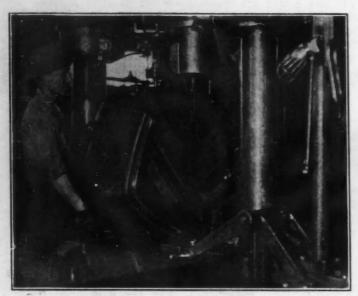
Hydraulic Presses Draw the Blanks into the Form of A Half-Shroud
